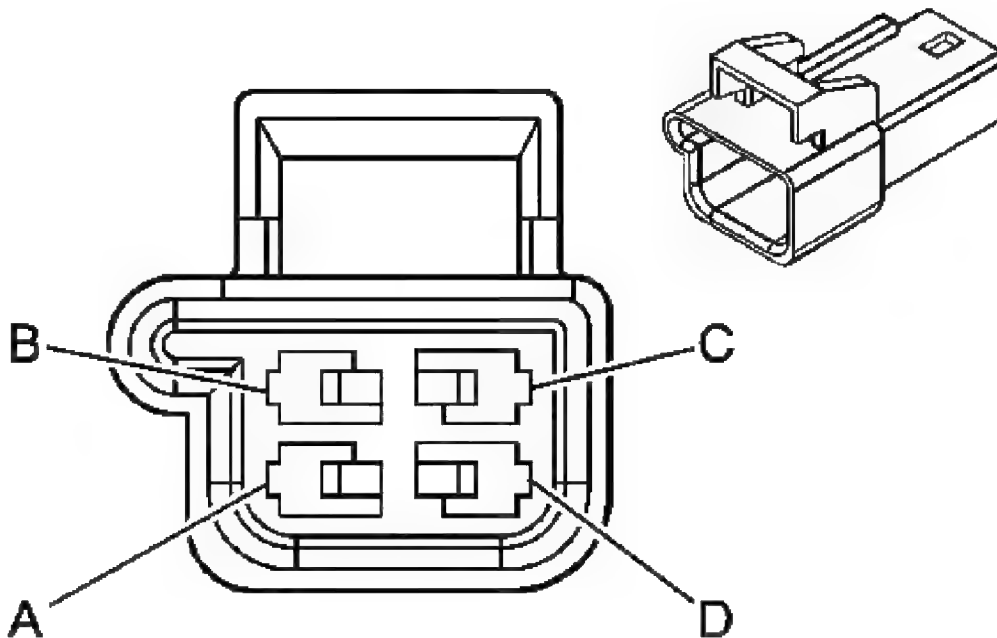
Right Front Heated Seat Back Element (KA1) Connector End View
